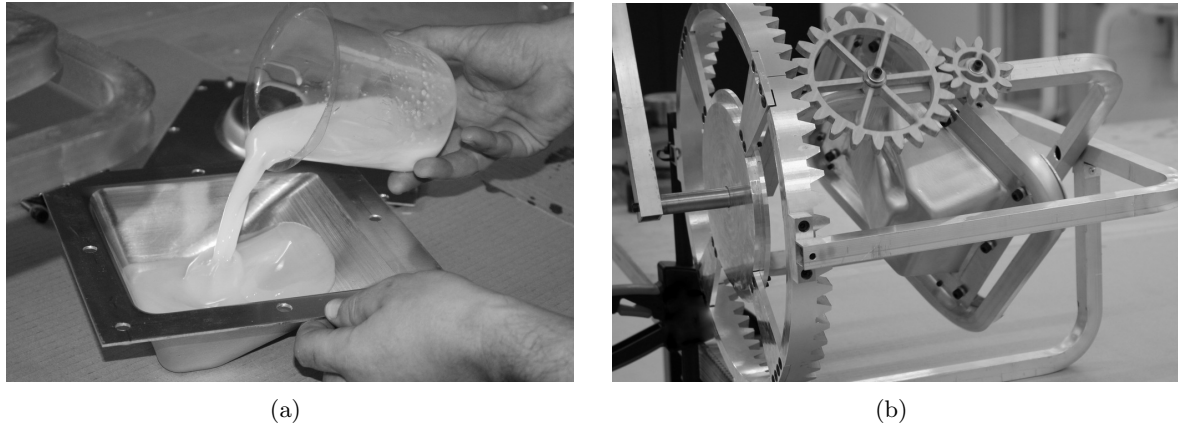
Rotocasting operation with the unfinished SPIF mould: (a) resin fill up (b) mould rotation
